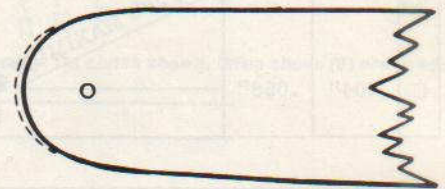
Worn tip (nose) can be caused by excessive chain tension, insufficient lubrication or cutting with dull or damaged cutters.
